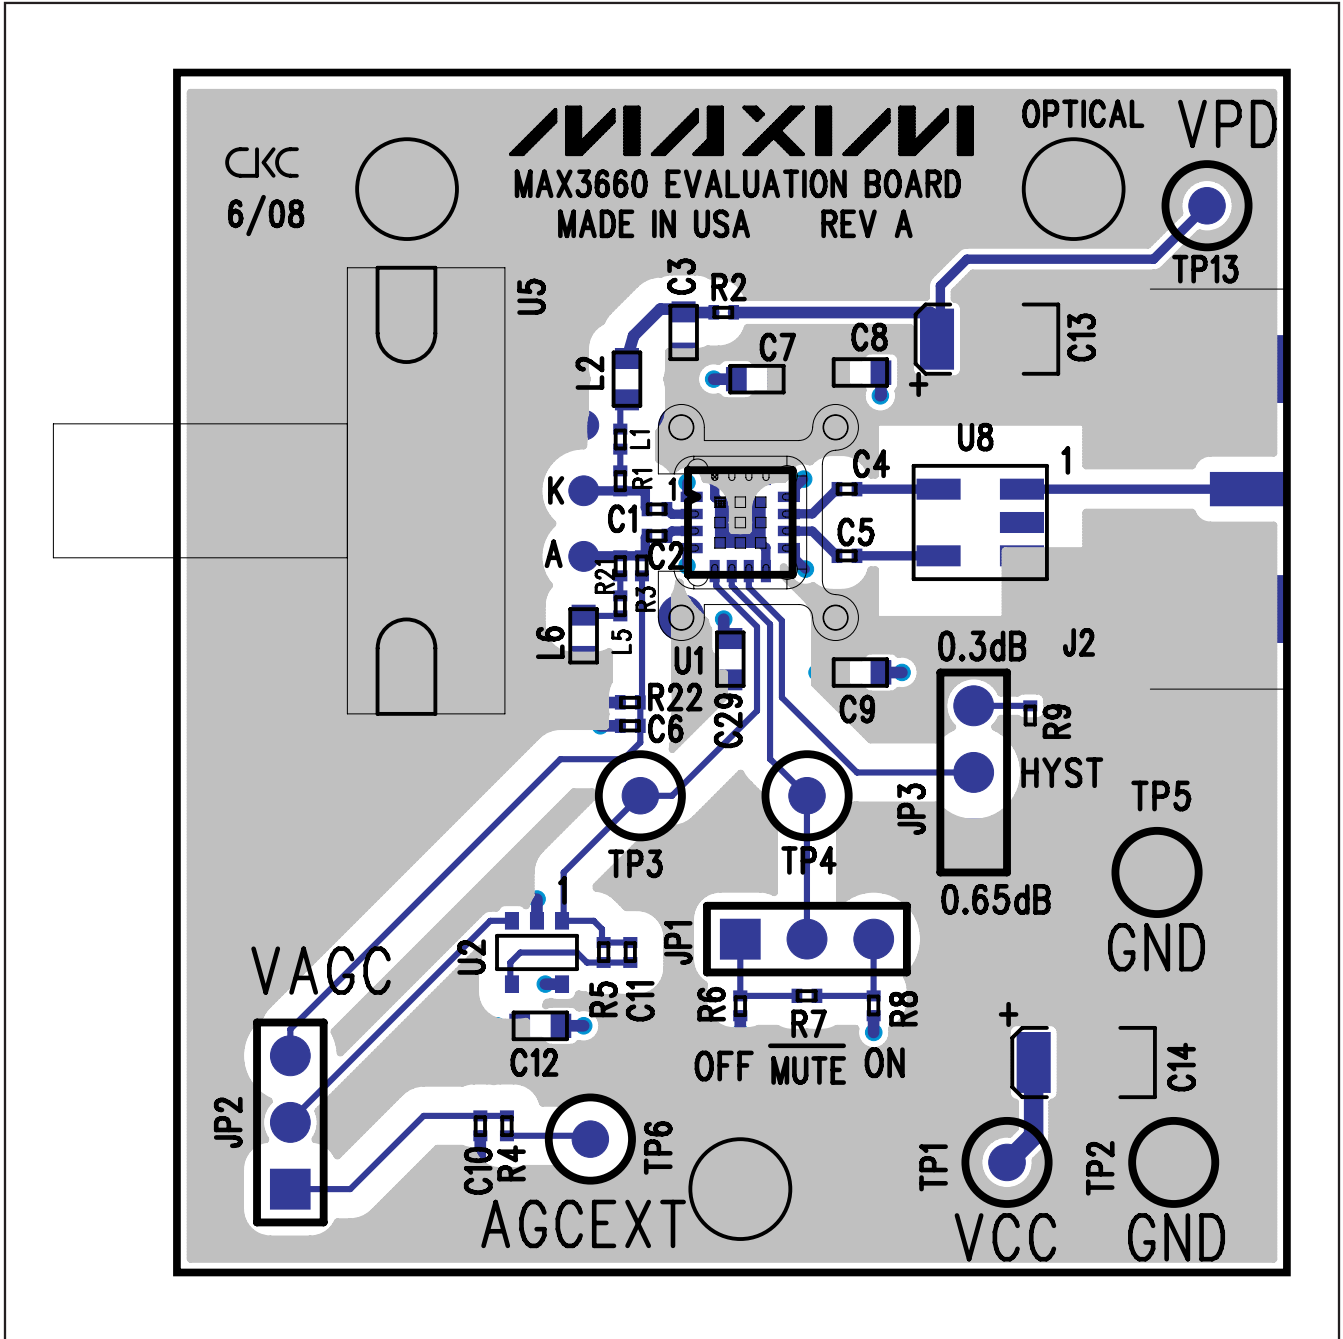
MAX3660 EV Kit Component Placement Guide—Component Side
